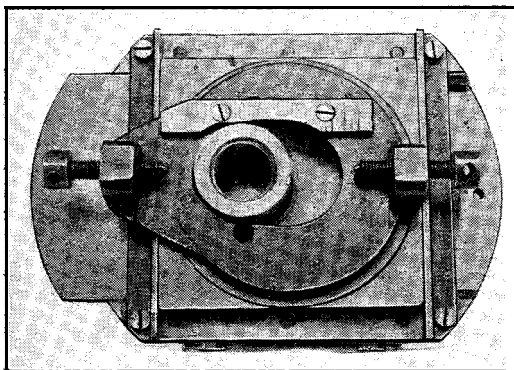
Back View of Oval Chuck, showing the Variable Eccentric Attachment.
